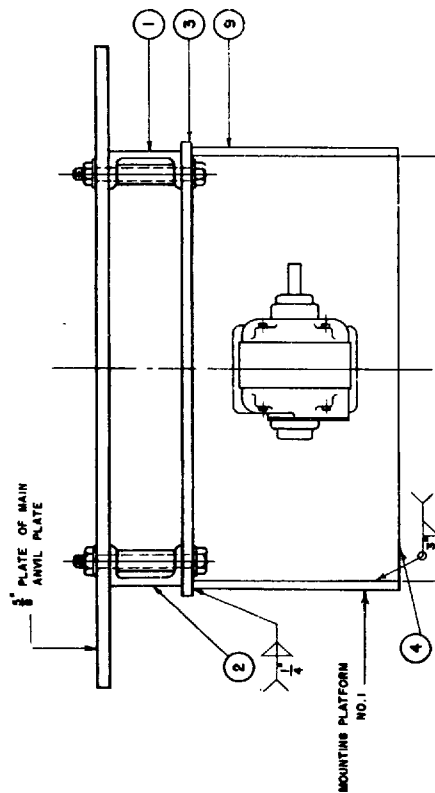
A.—Standard mounting for bulkhead mounted equipment: Type "A" test—Light-weight equipment.
